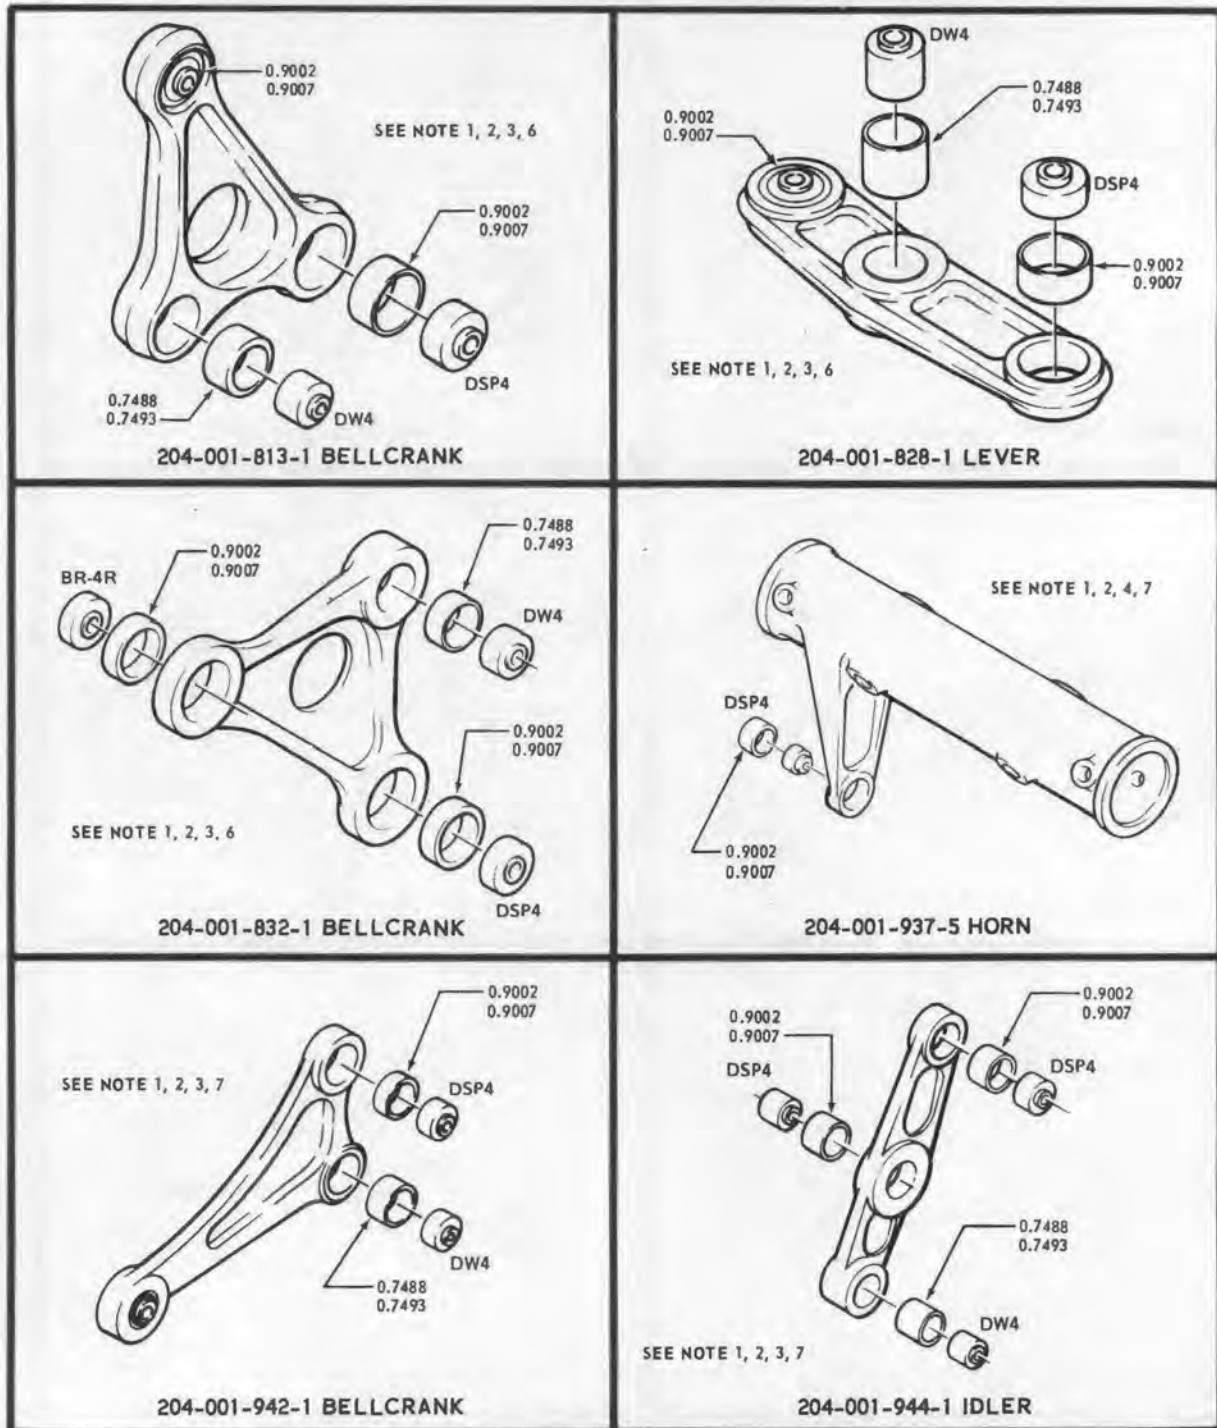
Bearing replacement (Sheet 3 of 7)
